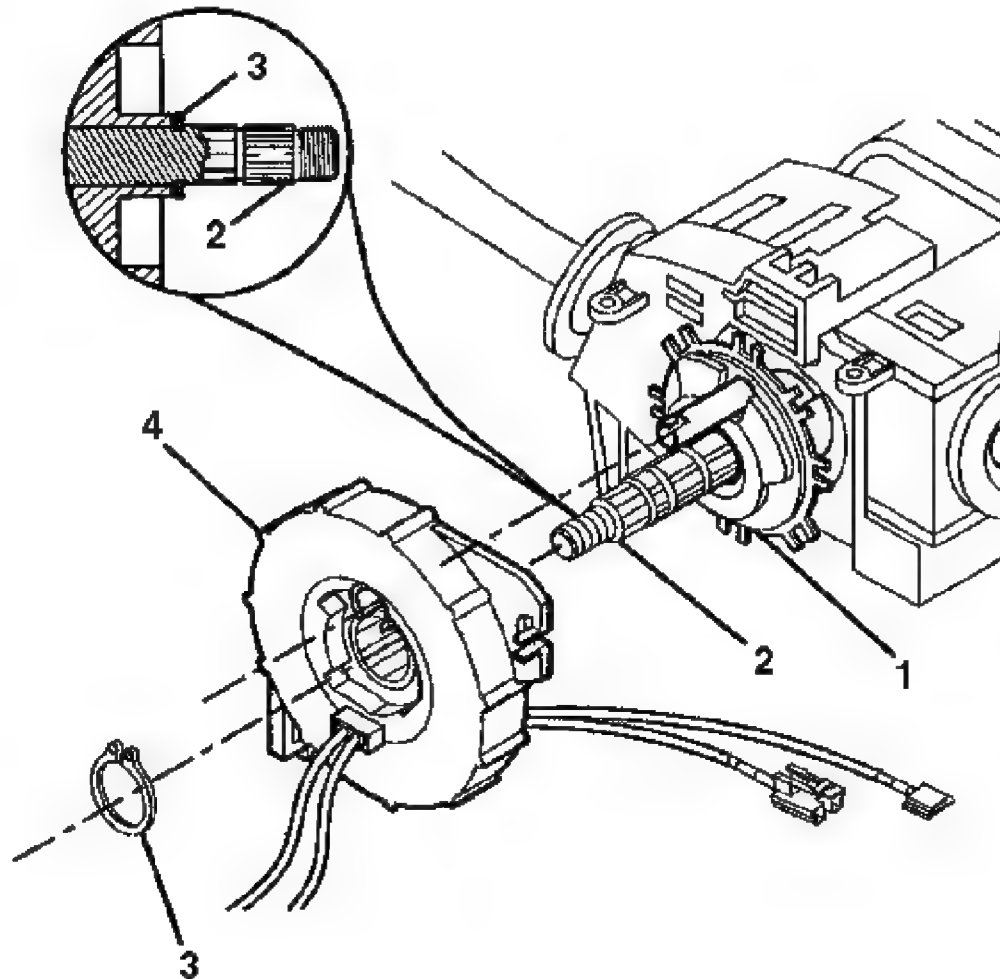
Identifying SIR Coil, Steering Shaft Assembly & Retaining Ring
